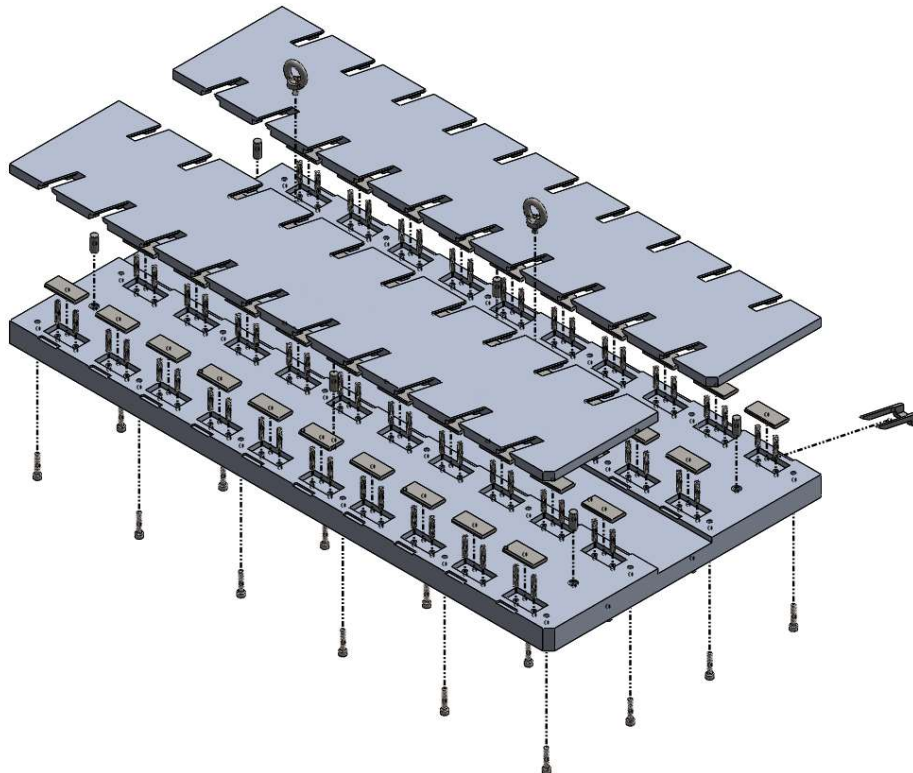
1<sup>st</sup> Stage Tool's Assembly Exploded View
